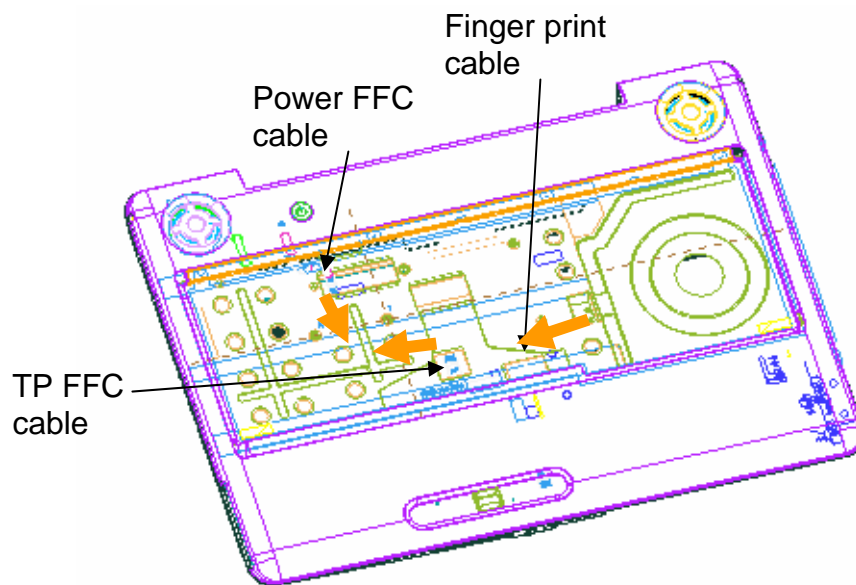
Disconnect the touch pad flat cable/Fingerprint cable
